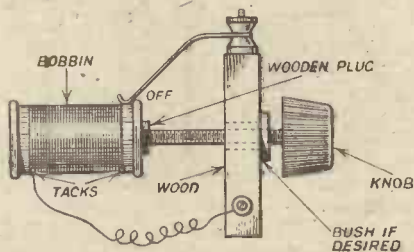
A vernier control is obtained by twisting the knob, whilst pushing or pulling the knob gives a coarse adjustment.
